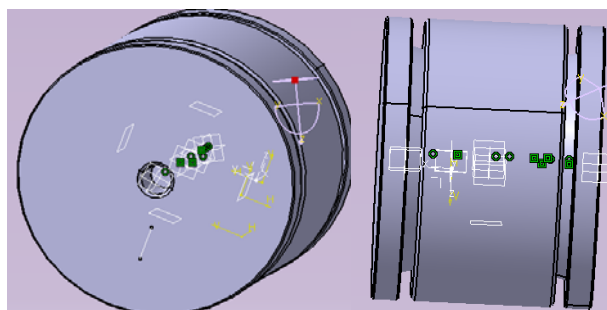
Subassembly between inferior cap, bolt and intermediary inner I
